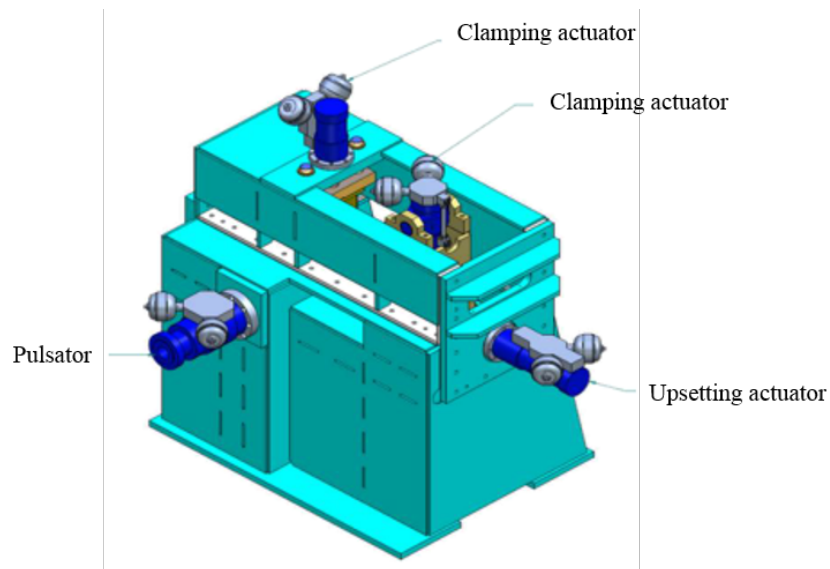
RSM-1 Linear friction welding machine<sup>113</sup>.
